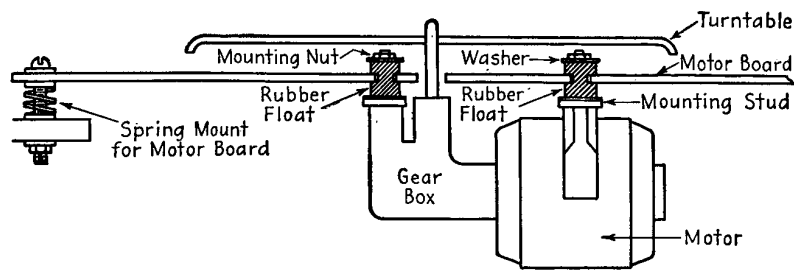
Phonograph-motor board assembly, showing rubber suspension mounting for the motor and spring mounting for the motor board.
